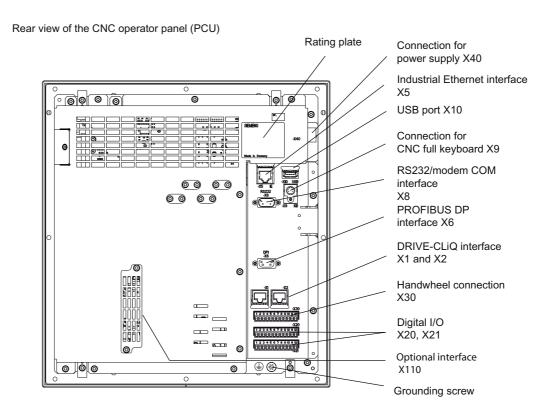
Position of the interfaces and front elements on the CNC operator panel (PCU)
